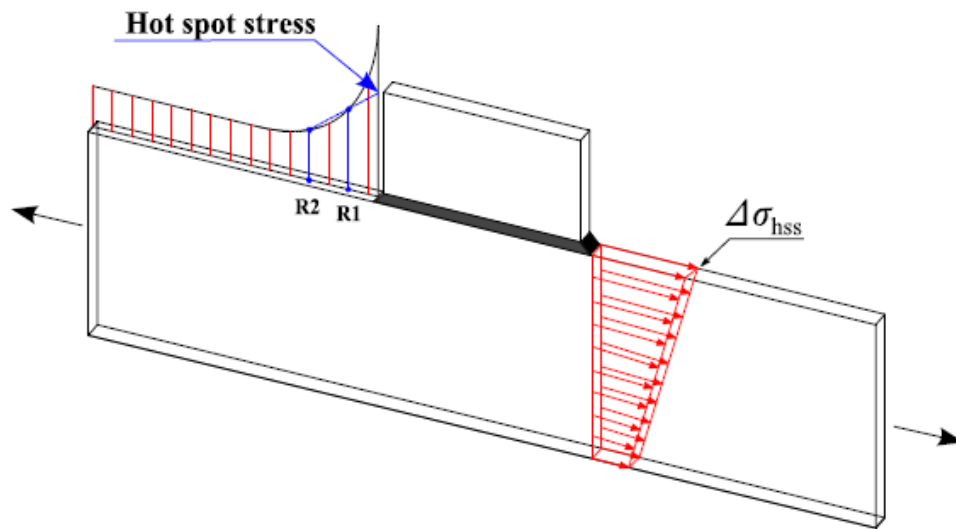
1- 4 Hot spot stress definition at the weld toe in plate edge joint [4].
